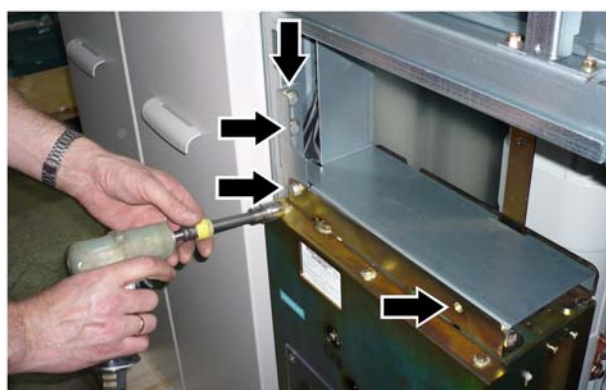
Bolted joints on 3AH6 vacuum circuit-breaker
